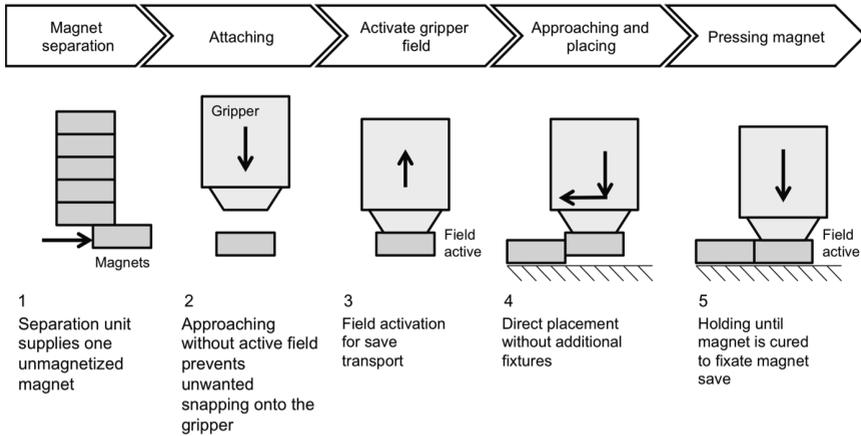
The handling process for unmagnetized magnets with the ELMAG gripper concept is divided into five main steps.
